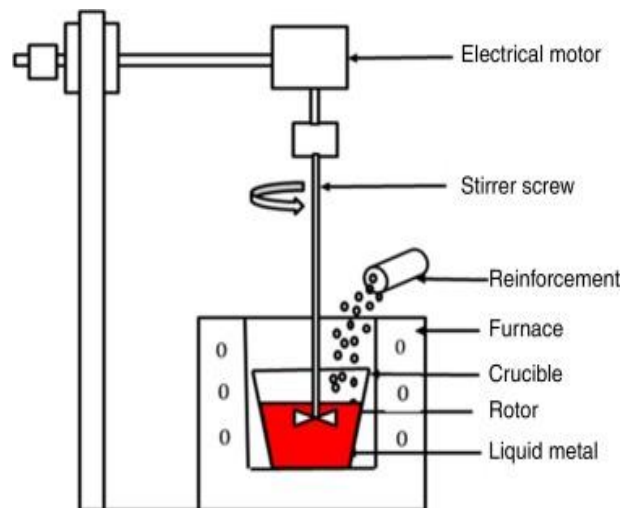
Stir casting Investigational set up (Maruyama [103])
